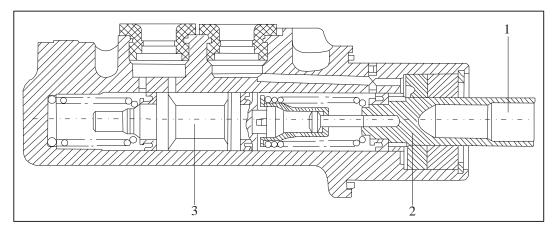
Structure of Brake Master Cylinder 1-Brake pushrod 2-Piston a 3-Piston b
